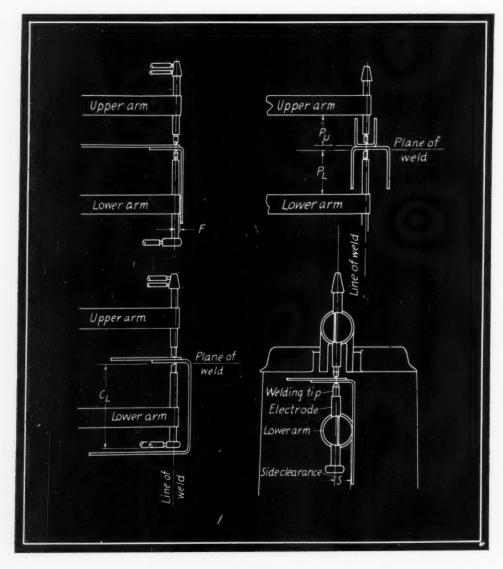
Limitation of space between the arms and necessity of removing work after welding impose limits on the location of welds
